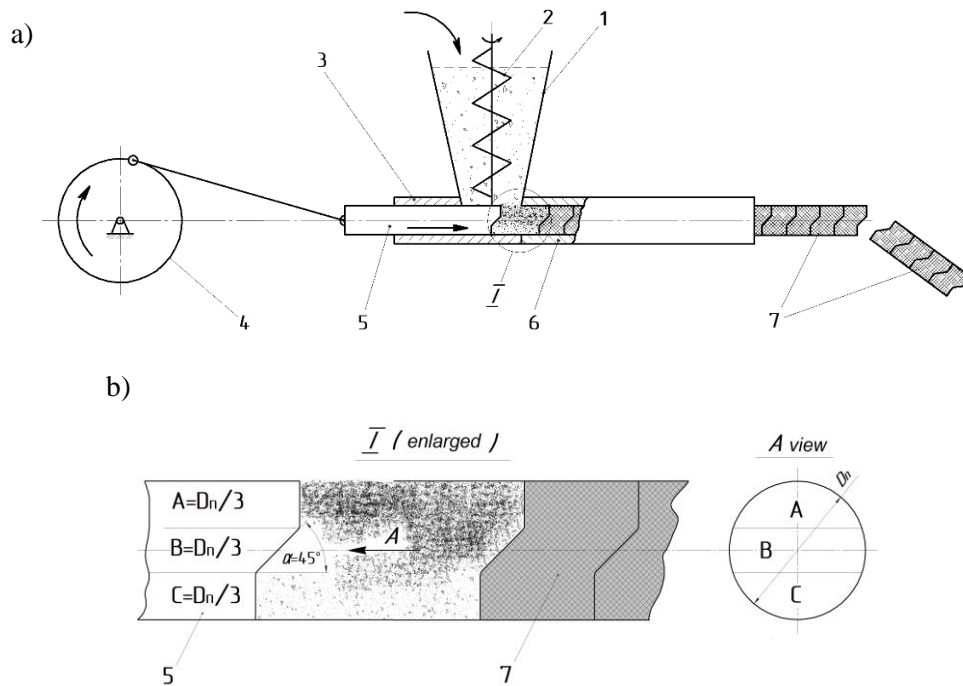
Structural and functional diagram of the modernized impact briquetting press; general view (a); end section of the stamp piston 5 with enhancement elements (b): 1 – loading hopper; 2 – feeder; 3 – housing; 4 – flywheel; 5 – stamping piston; 6 – die; 7 – briquettes
